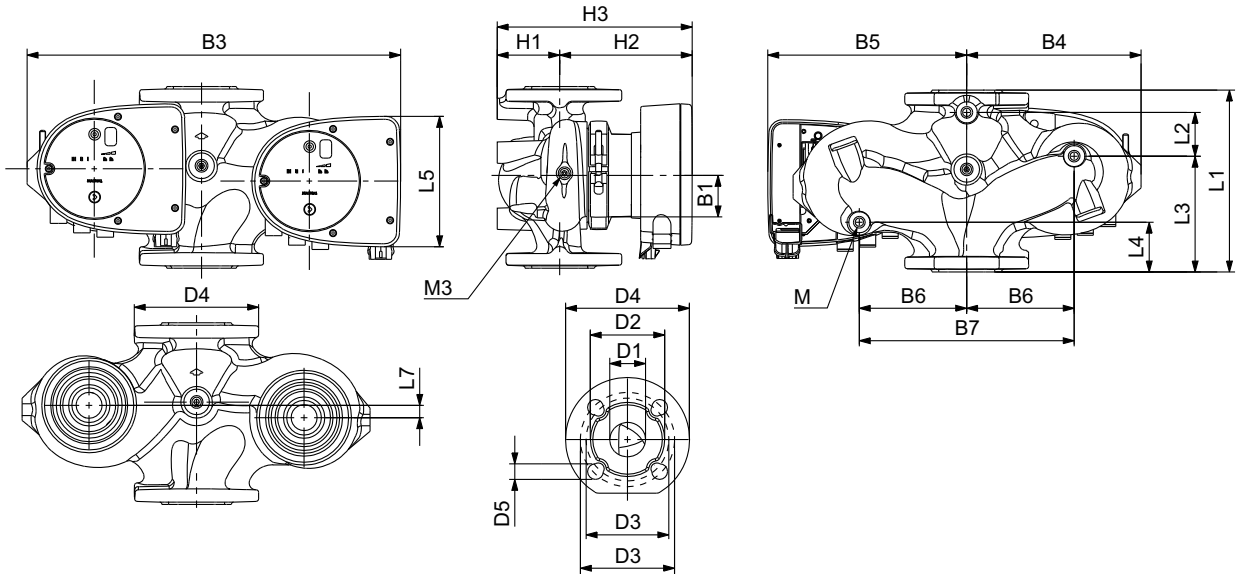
Twin-head pump dimensions, plug-connected versions, flanged version
